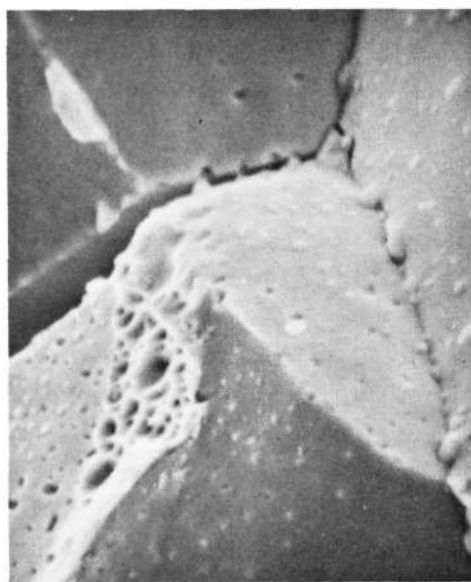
Scanning Electron Micrographs of Fracture Surface of GTA Weld Specimen 3 ; Fractured at -196°C (-320°F).
